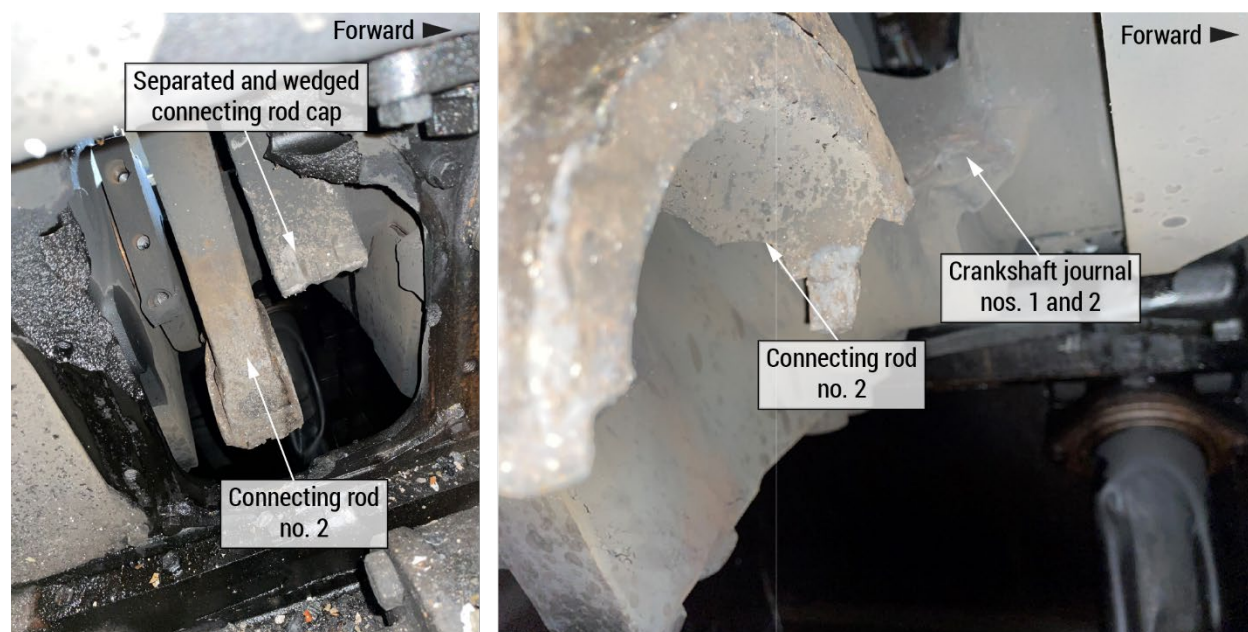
Left to right: Damage to the port main engine connecting rod and crankcase.
